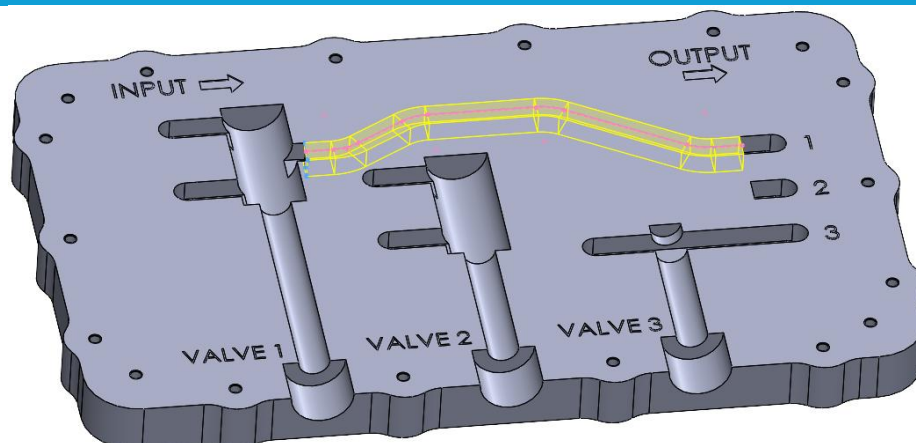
Example tools used in this model: a) extruded cut, b) swept cut
